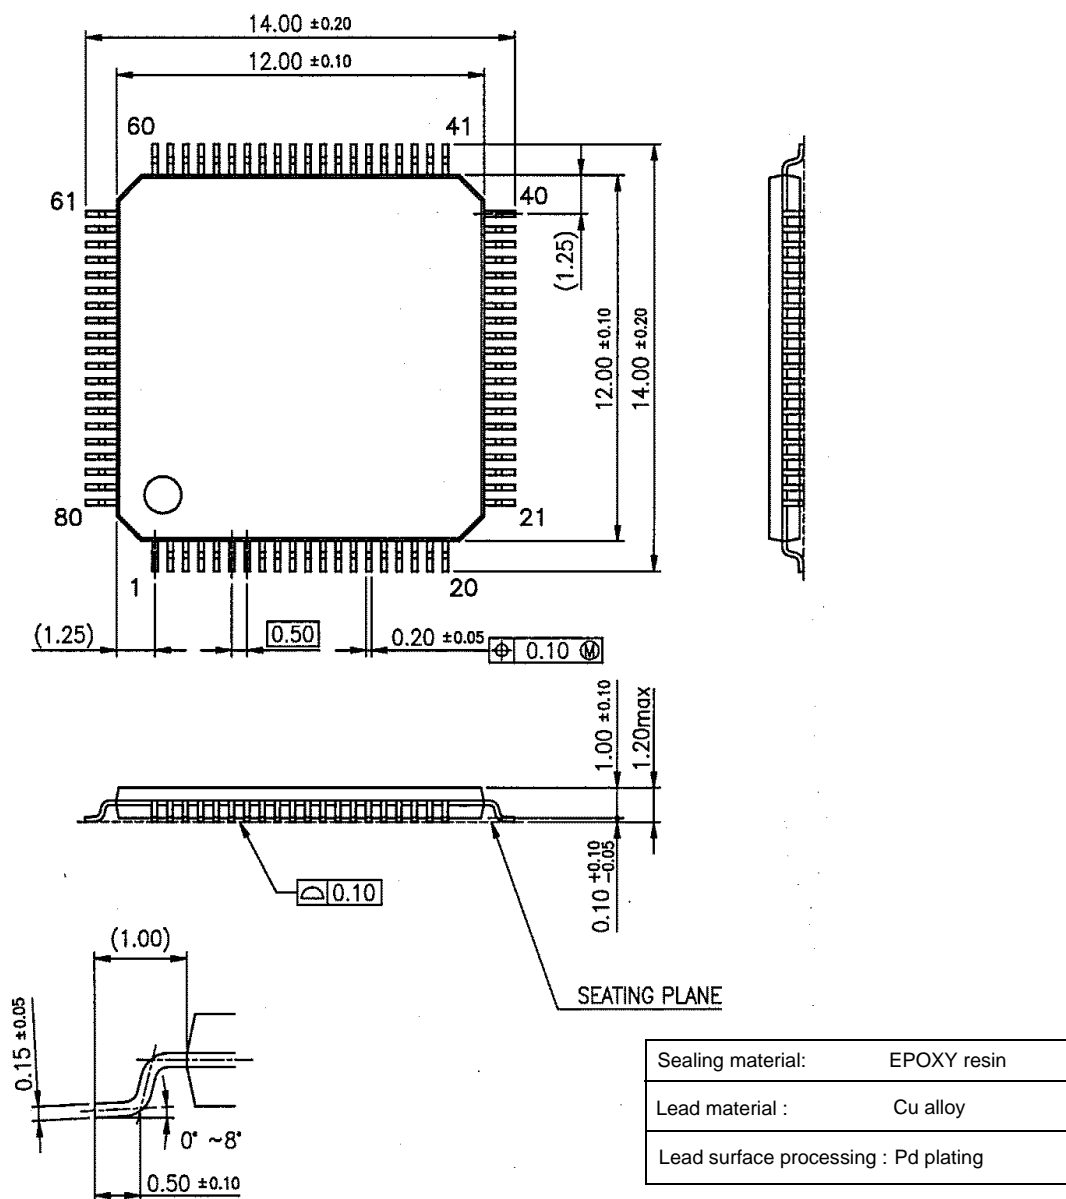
Package Dimension of MN103SFN2/N6 series
